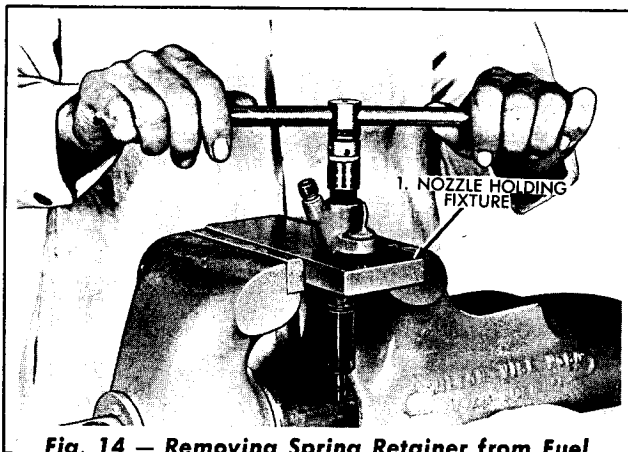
Removing Spring Retainer from Fuel Injection Nozzle Holder
